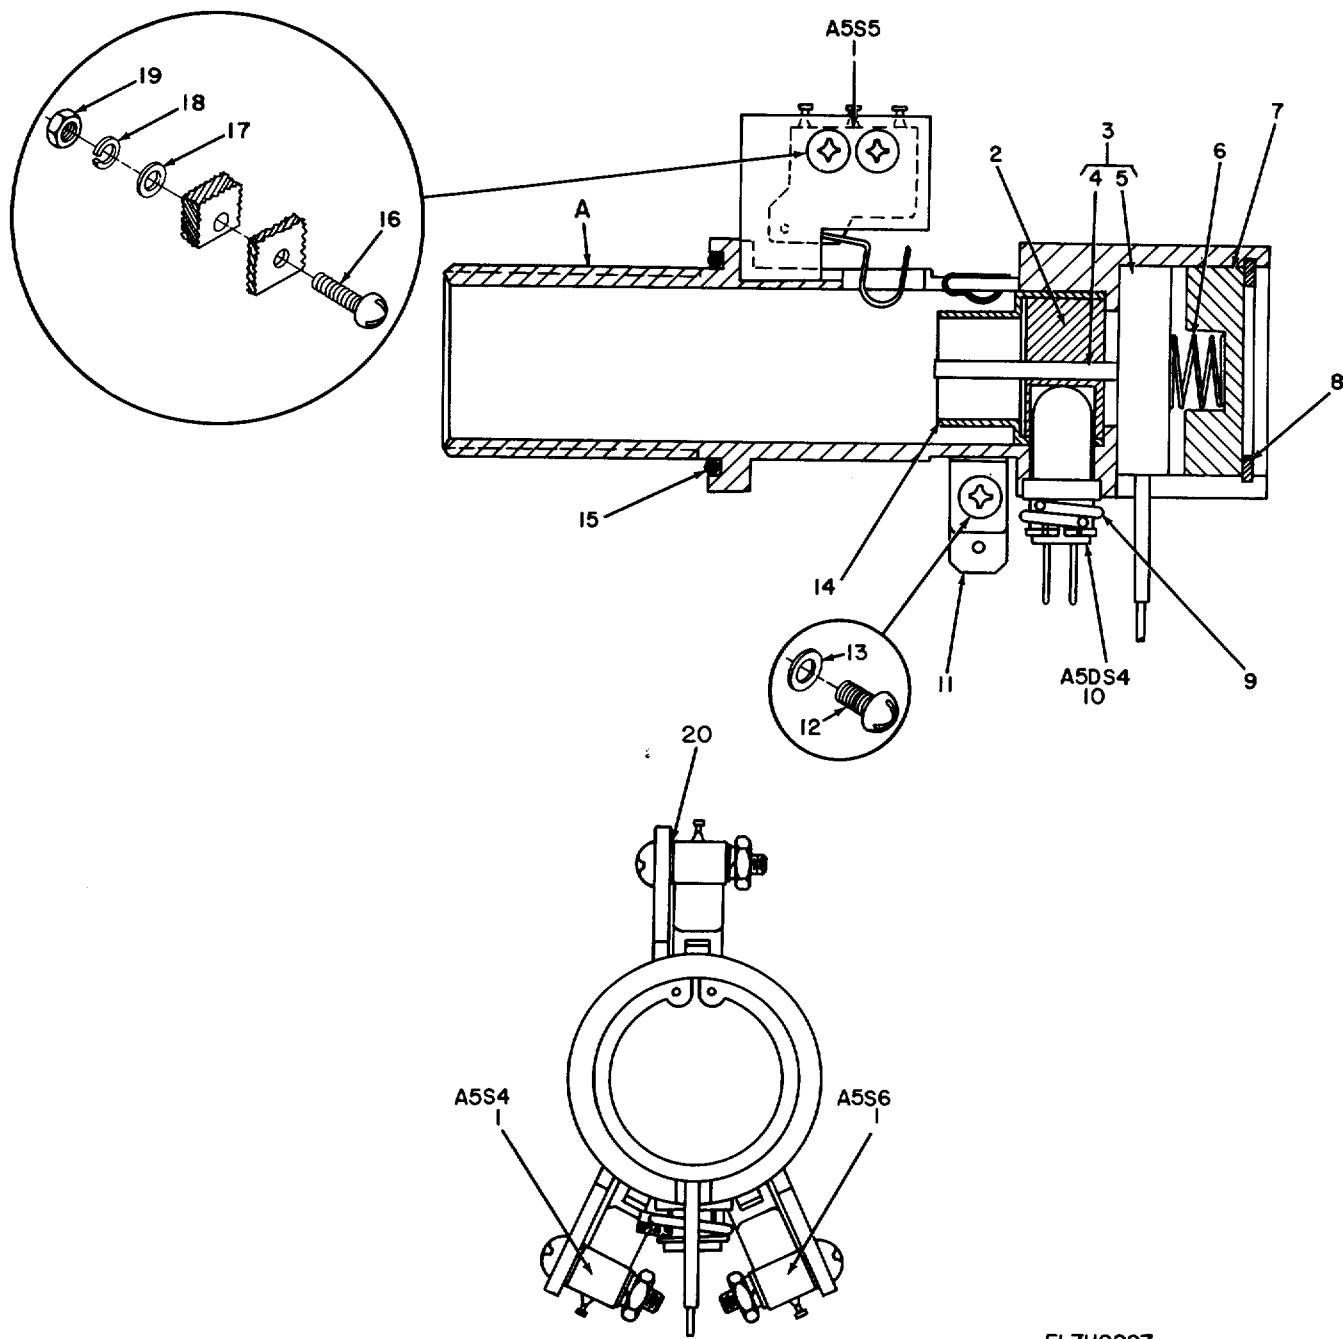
Socket Assembly, Charging (Sheet 1 of 2).
